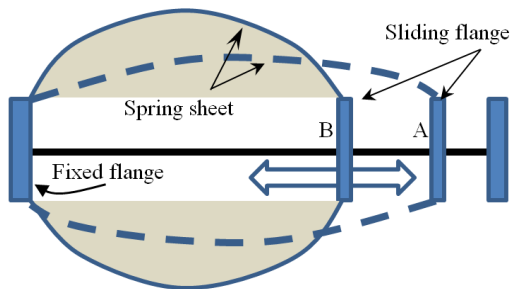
When slide flange moves from A to B, a wider radial dimension for the clamp can be achieved.
